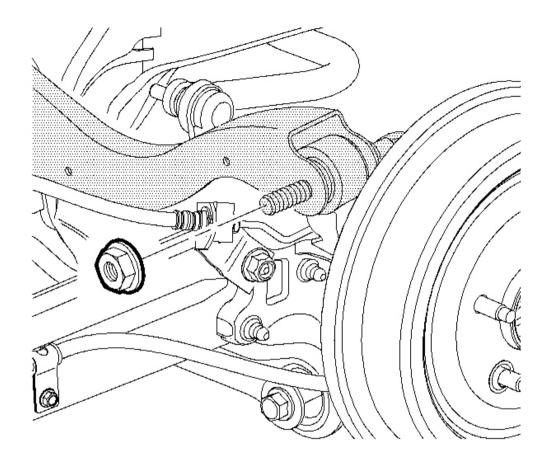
ABS Brake Harness, Upper Control Arm, Knuckle Nut & Bolt Courtesy of GENERAL MOTORS CORP.
